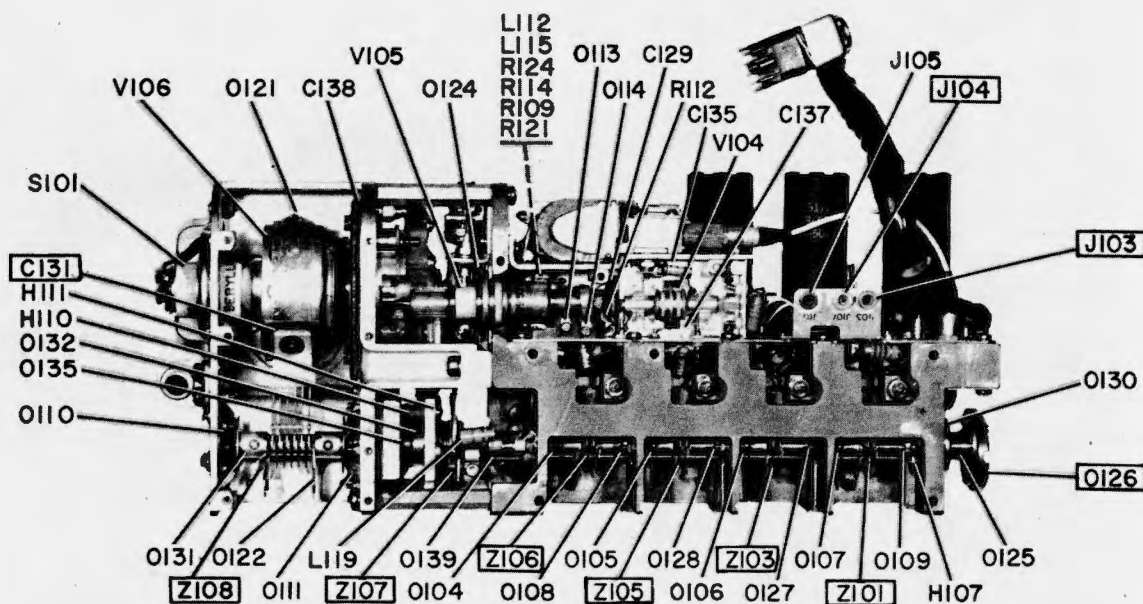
RT-581( )/URC-9, RF and PA Amplifier Assembly, Left Side
